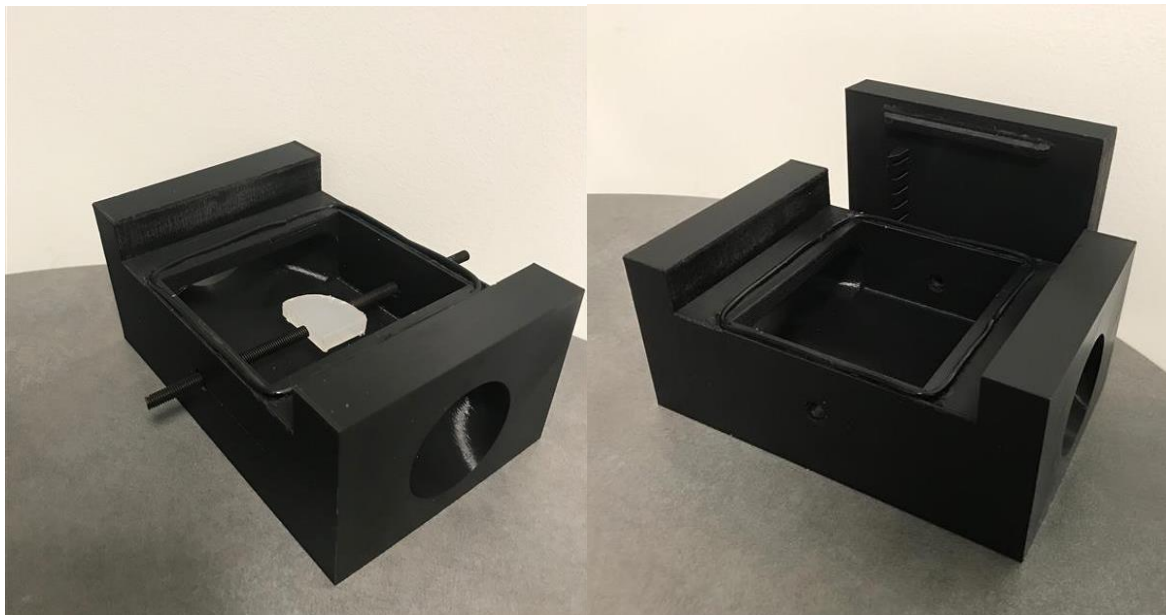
Prototype printed by a third-party manufacturer from the CAD model developed in house.
